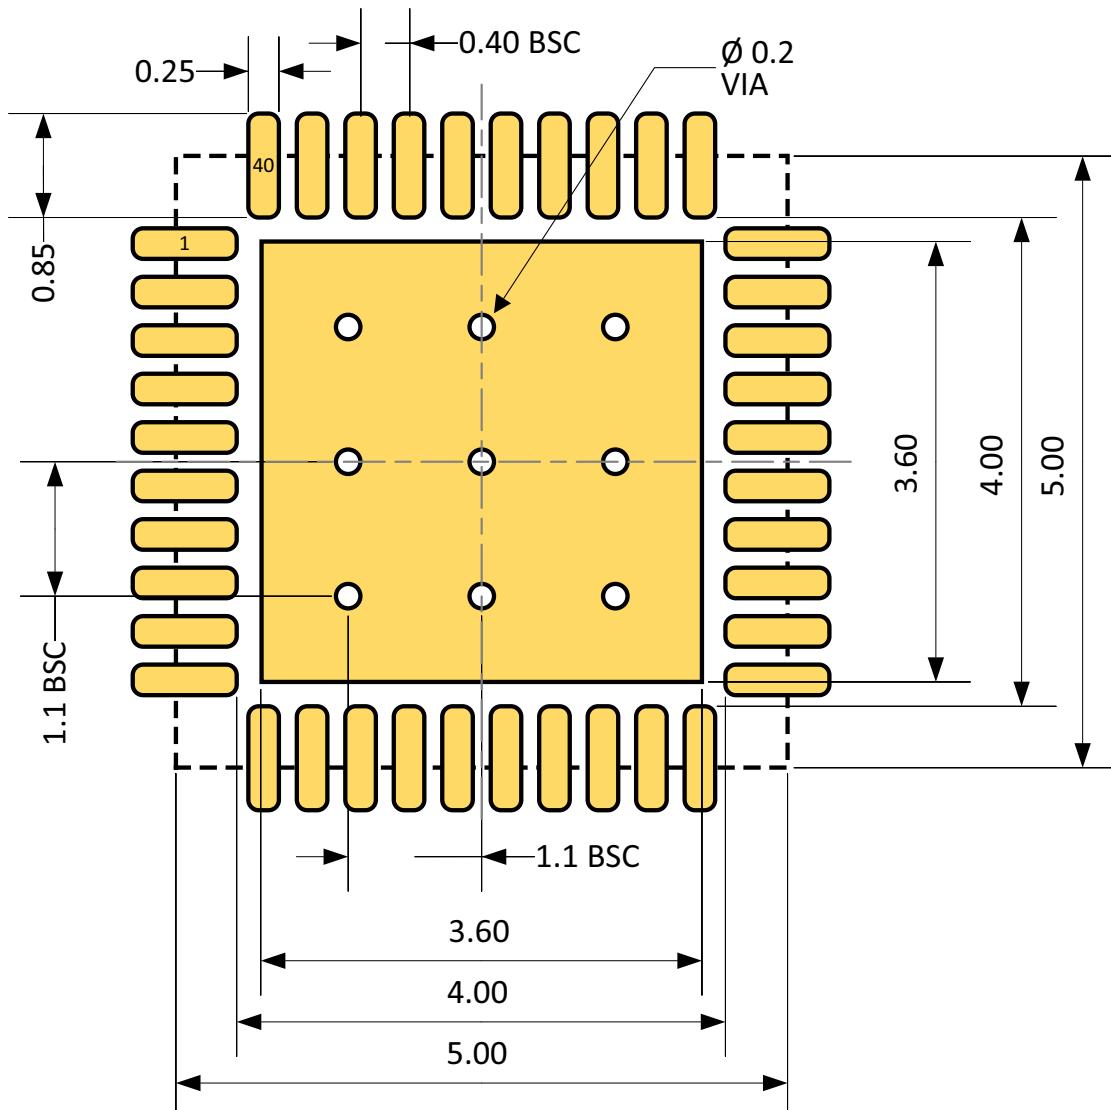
Recommended board layout for QFN40 package (all dimensions in mm)
